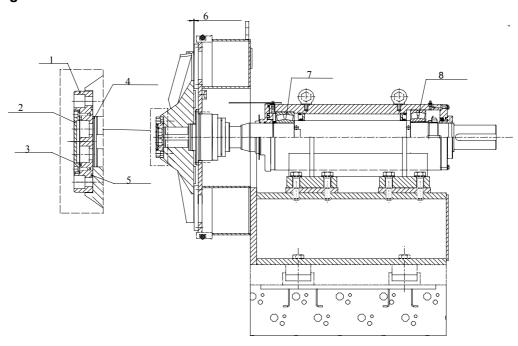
Adjusting the rotor clearance, belt drive (STOA009546)
